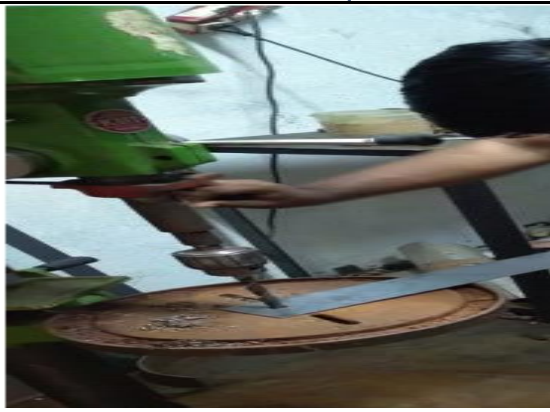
Drilling Centre Hole Using Drill Bit @ 12.5 Mm
